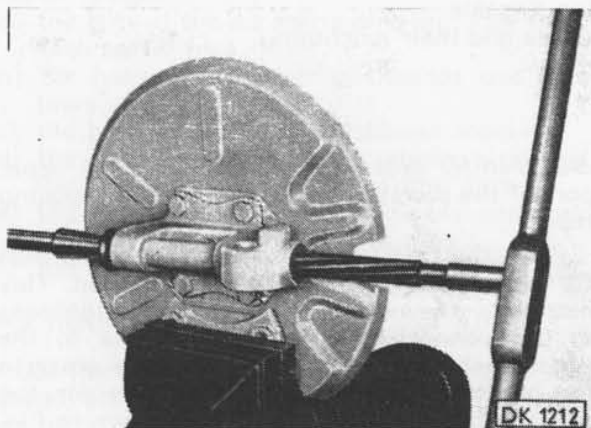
/4 - Reaming King Pin Bushes Using MP 6-114 Reamer and its Pilot Taper
